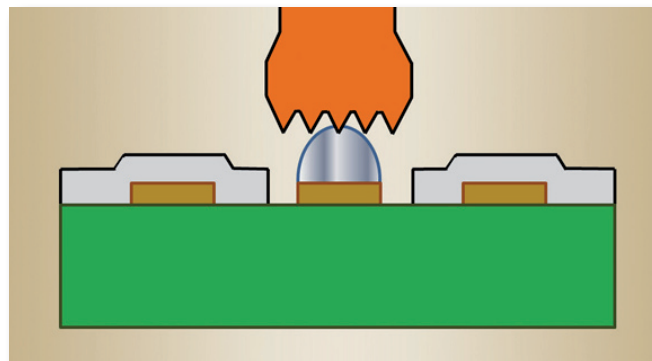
Waygood solder bump, targeted with a large, serrated fixture probe.
